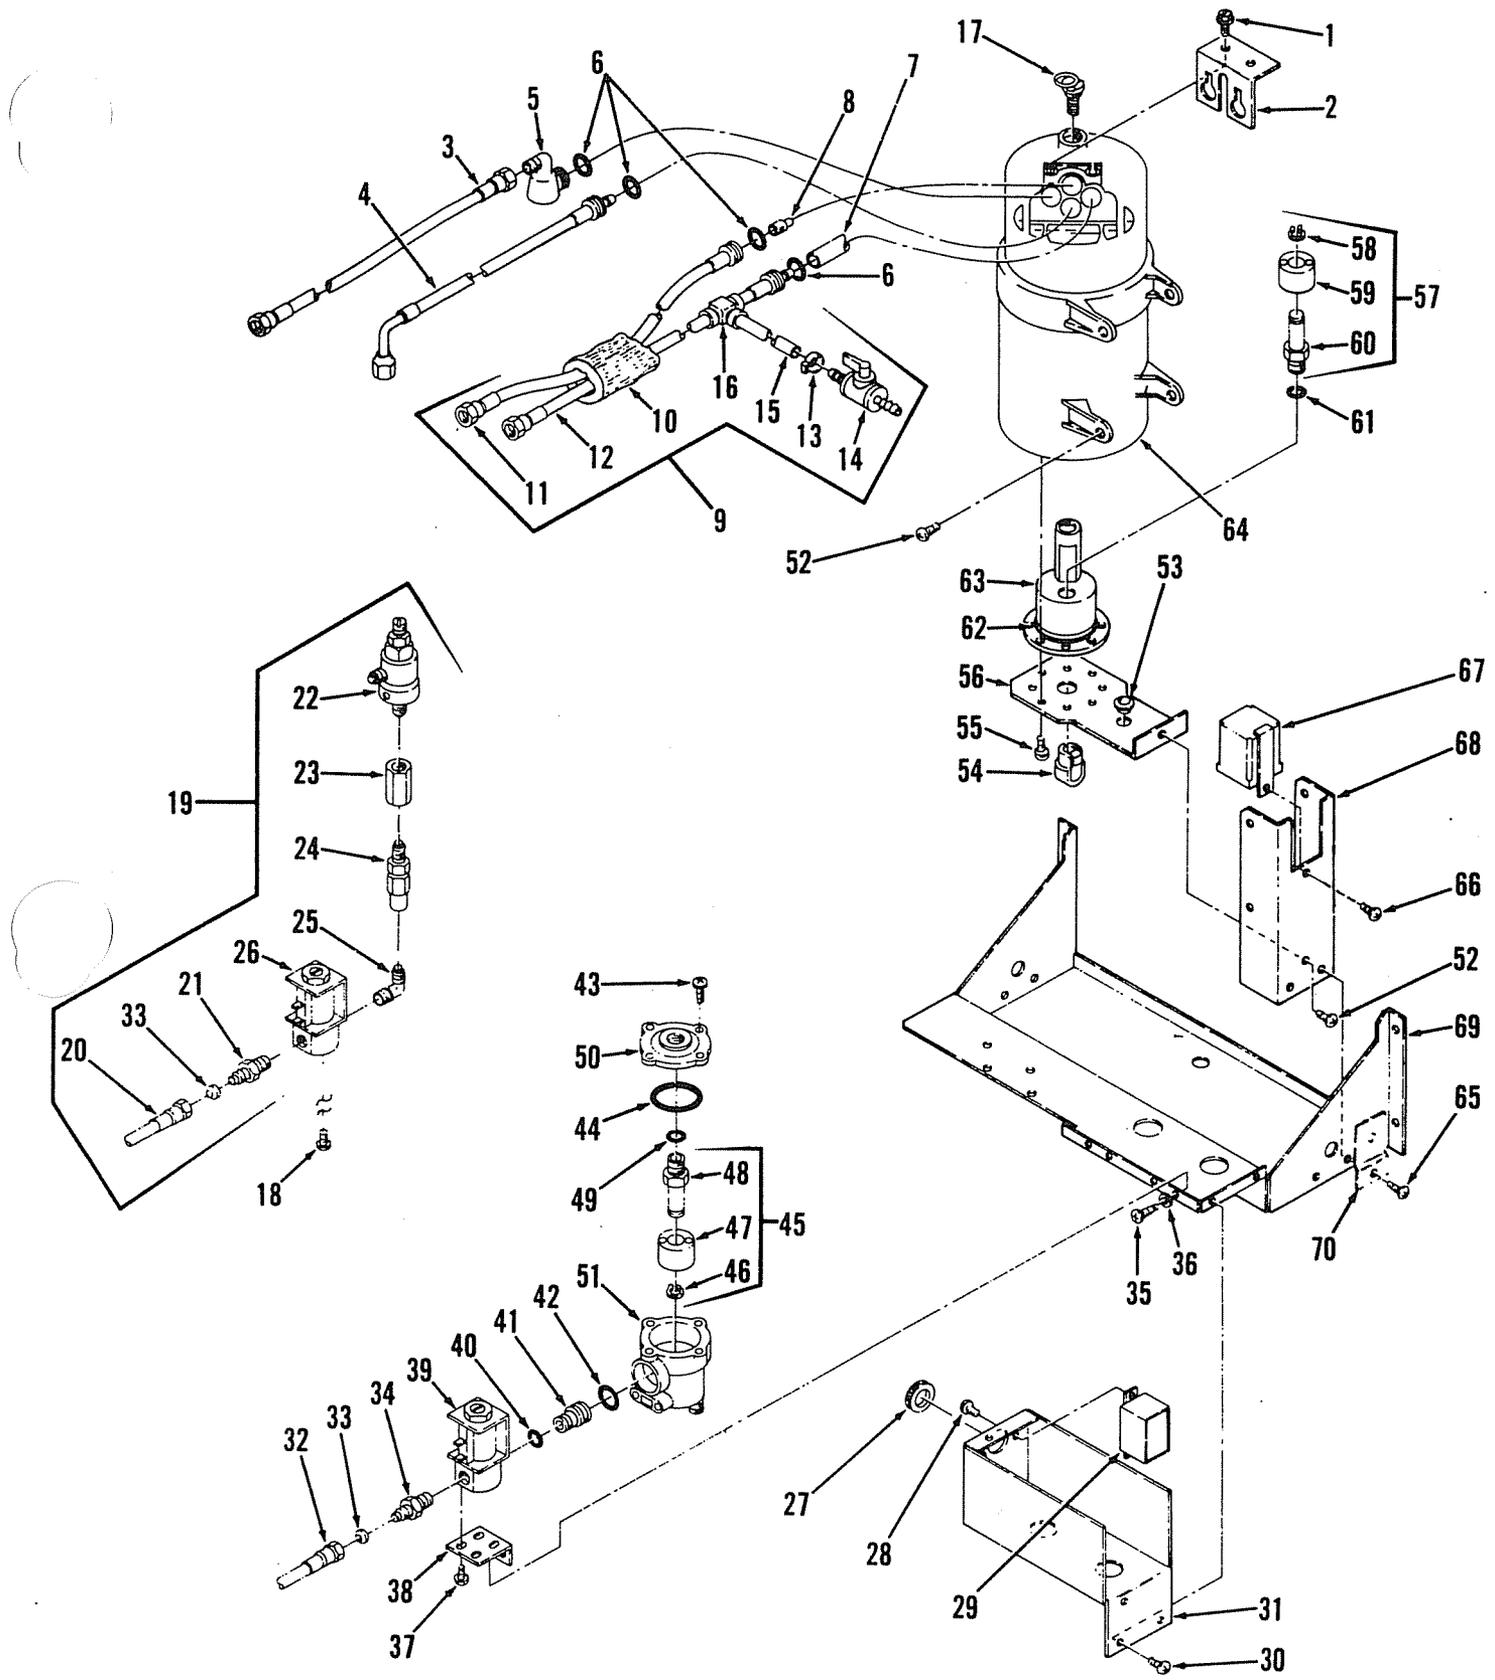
CARBONATOR-BLENDERS PLATFORM ASSEMBLY
